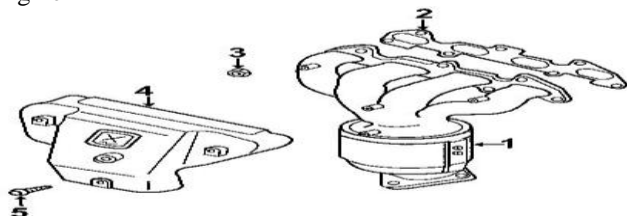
1.Manifold. 2. Gasket, 3. Nut, 4. Heat Shield, 5. Heat-Shield Bolt[19]
